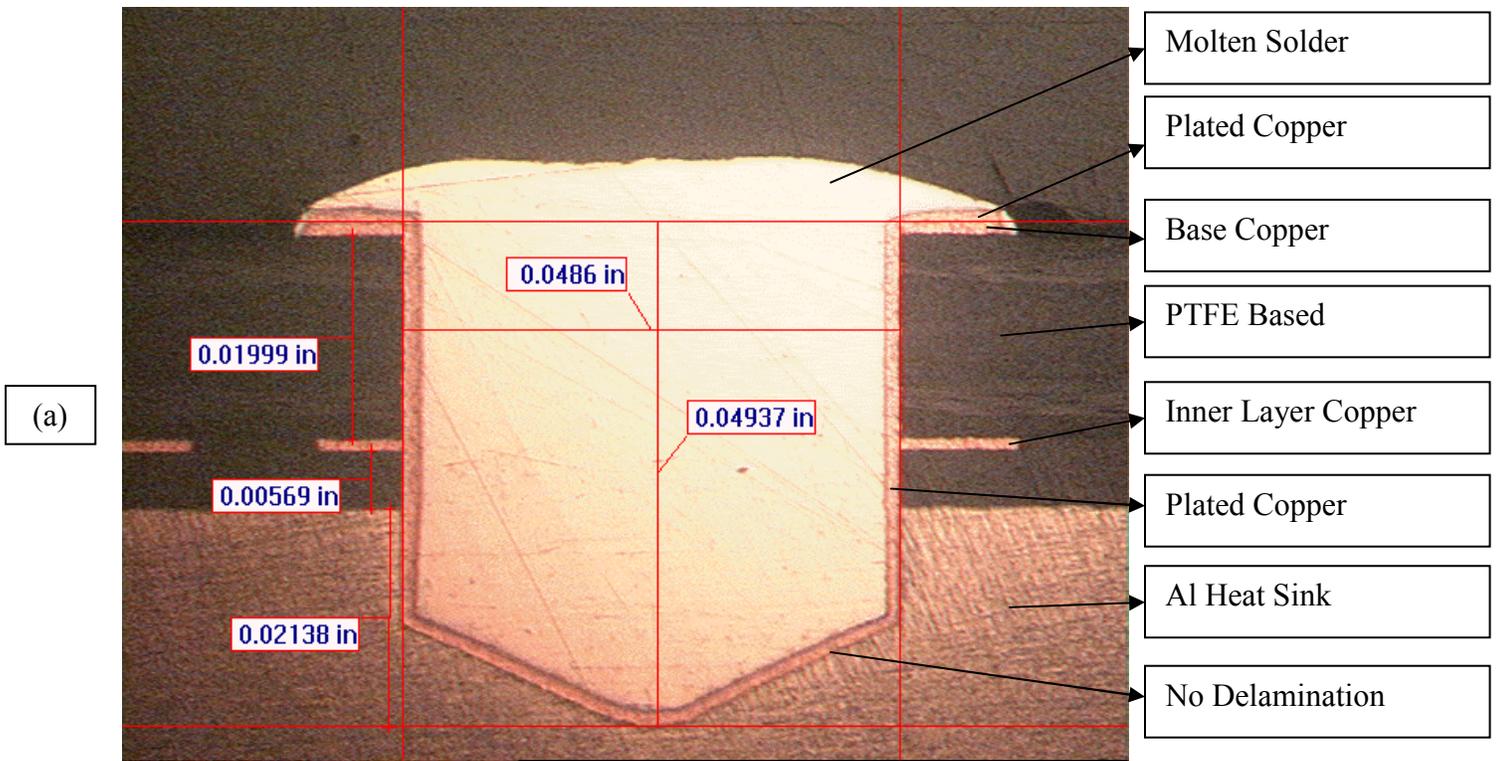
(a): Solder Stressed Blind Hole Cross Section. The measured thickness are: PTFE based dielectric = 19.99 mil, polyimide = 5.69 mil, hole diameter=48.6 mil, hole depth=49.37, hole depth into aluminum=21.38 mil. Figure 8(b): Exploded View of Solder Stressed Section.
